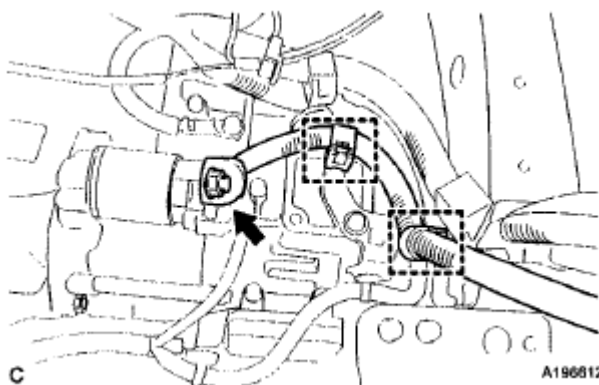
Locating Positive (+) Cable Nut With Clamps
